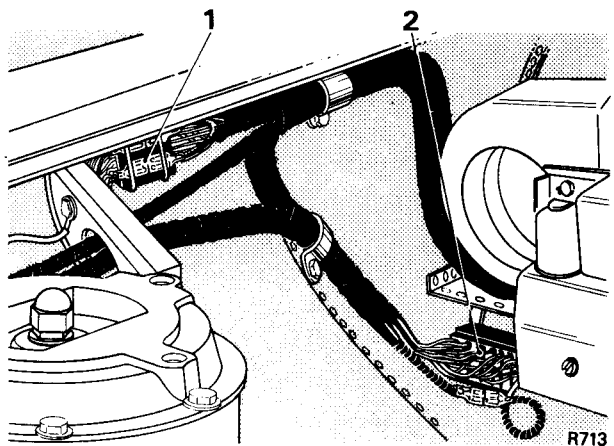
POSITION OF ENGINE LOOM SOCKET
